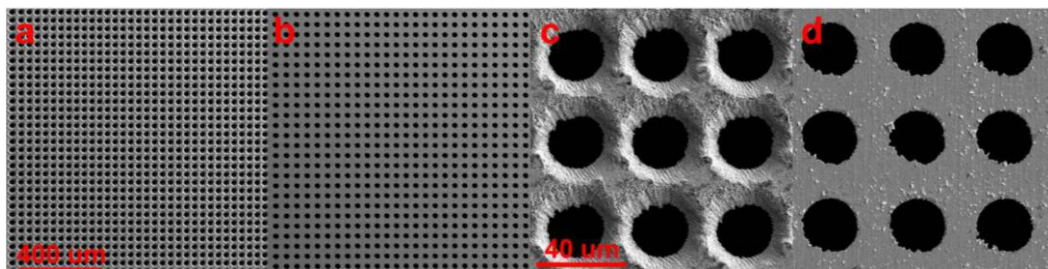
Drilling on the fly through a 10  $\mu\text{m}$  steel foil (a) Inlet; (b) Outlet; (c) Detail view of a; (d) Detail view of b
